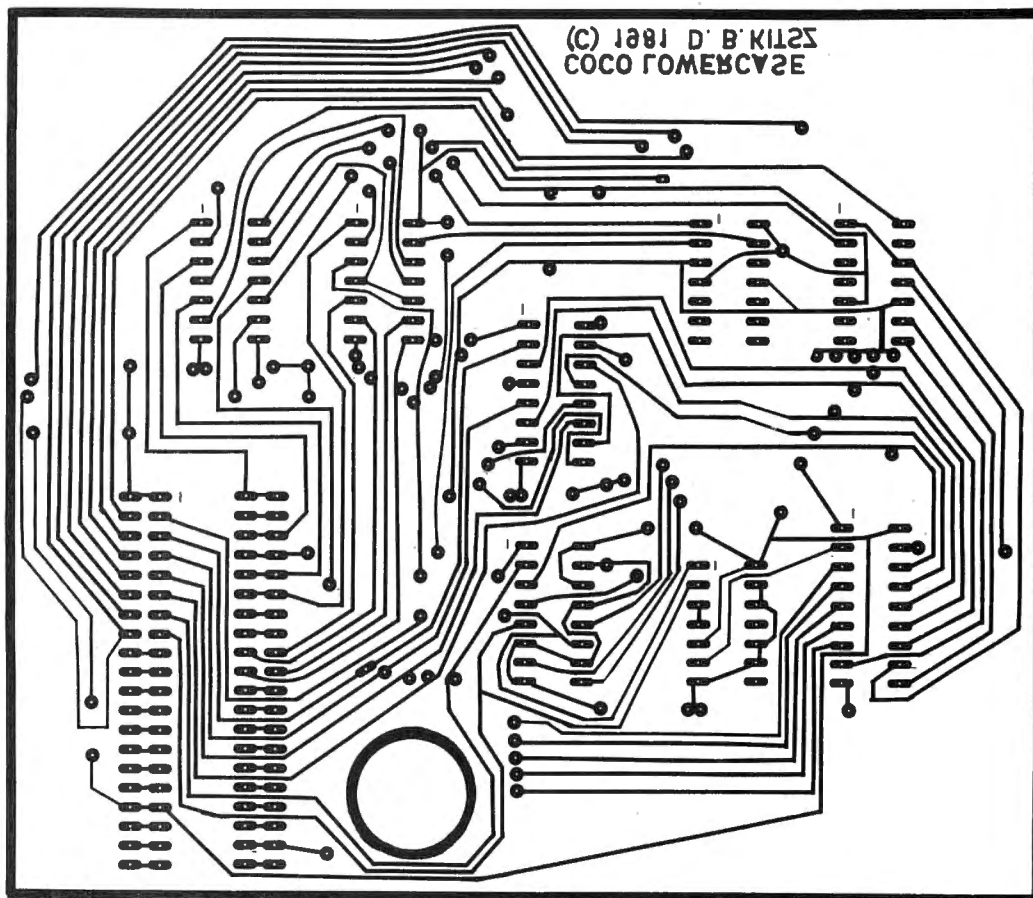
Complete printed circuit board layout for the Color Computer lowercase modification. Post hole must be cut before mounting parts on the board. Note that this is the bottom of the PC board, viewed from above and through the board.
